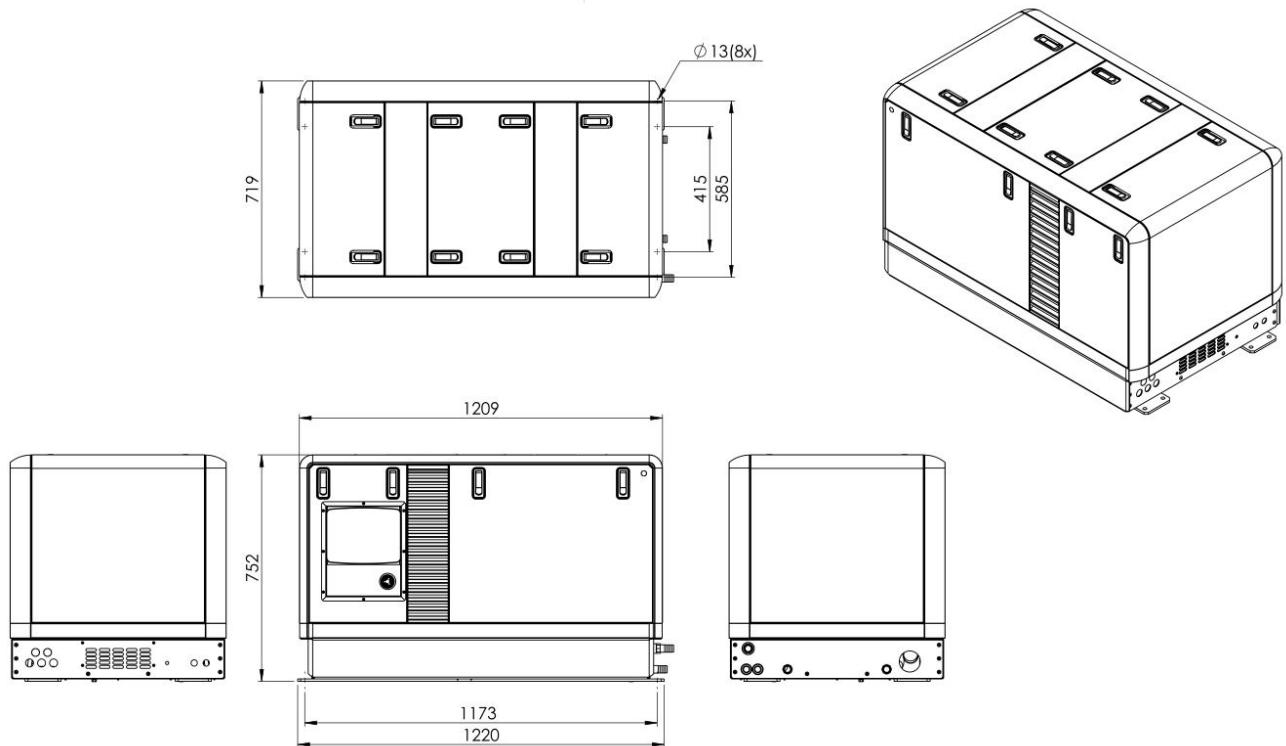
Outer dimensions (mm) SQ- PRO 18
